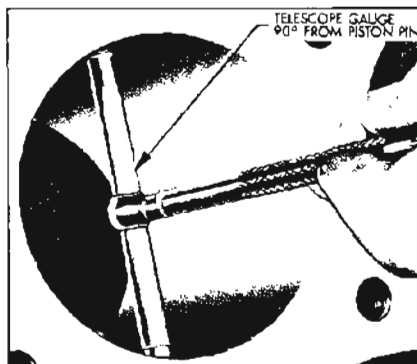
Using Telescope Gauge in Cylinder Bore
